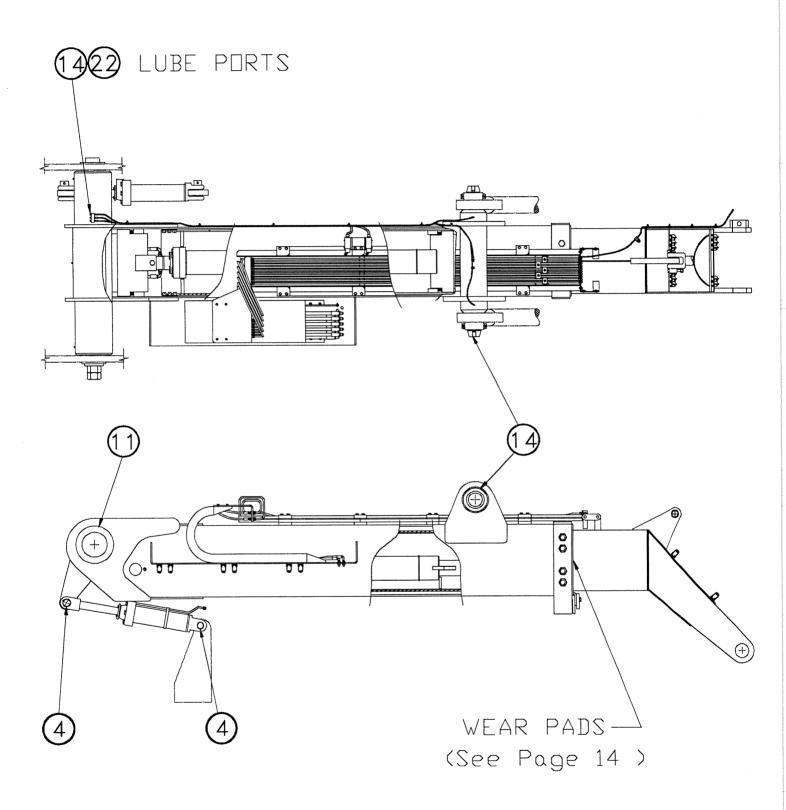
NCH35 Boom Assembly Maintenance and Lubrication Chart
